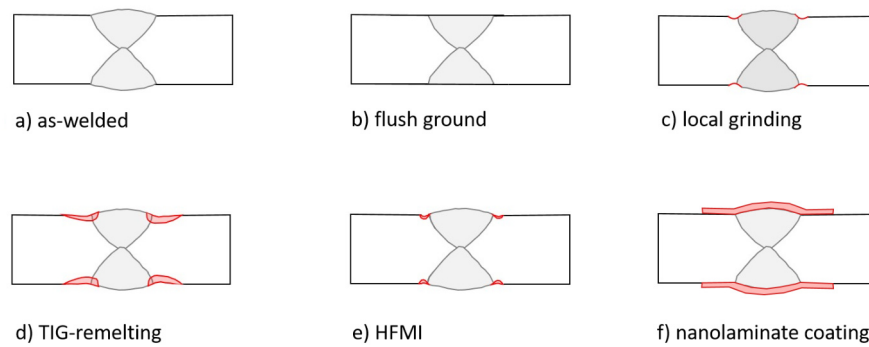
Schematic depiction of post-weld treatment methods for butt-welds; a) as-welded cross-section of a butt-weld; b) flush ground surface; c) local grinding of the weld toe; d) TIG-remelted weld toes; e) HFMI treated weld toes; f) weld coated with NMM
